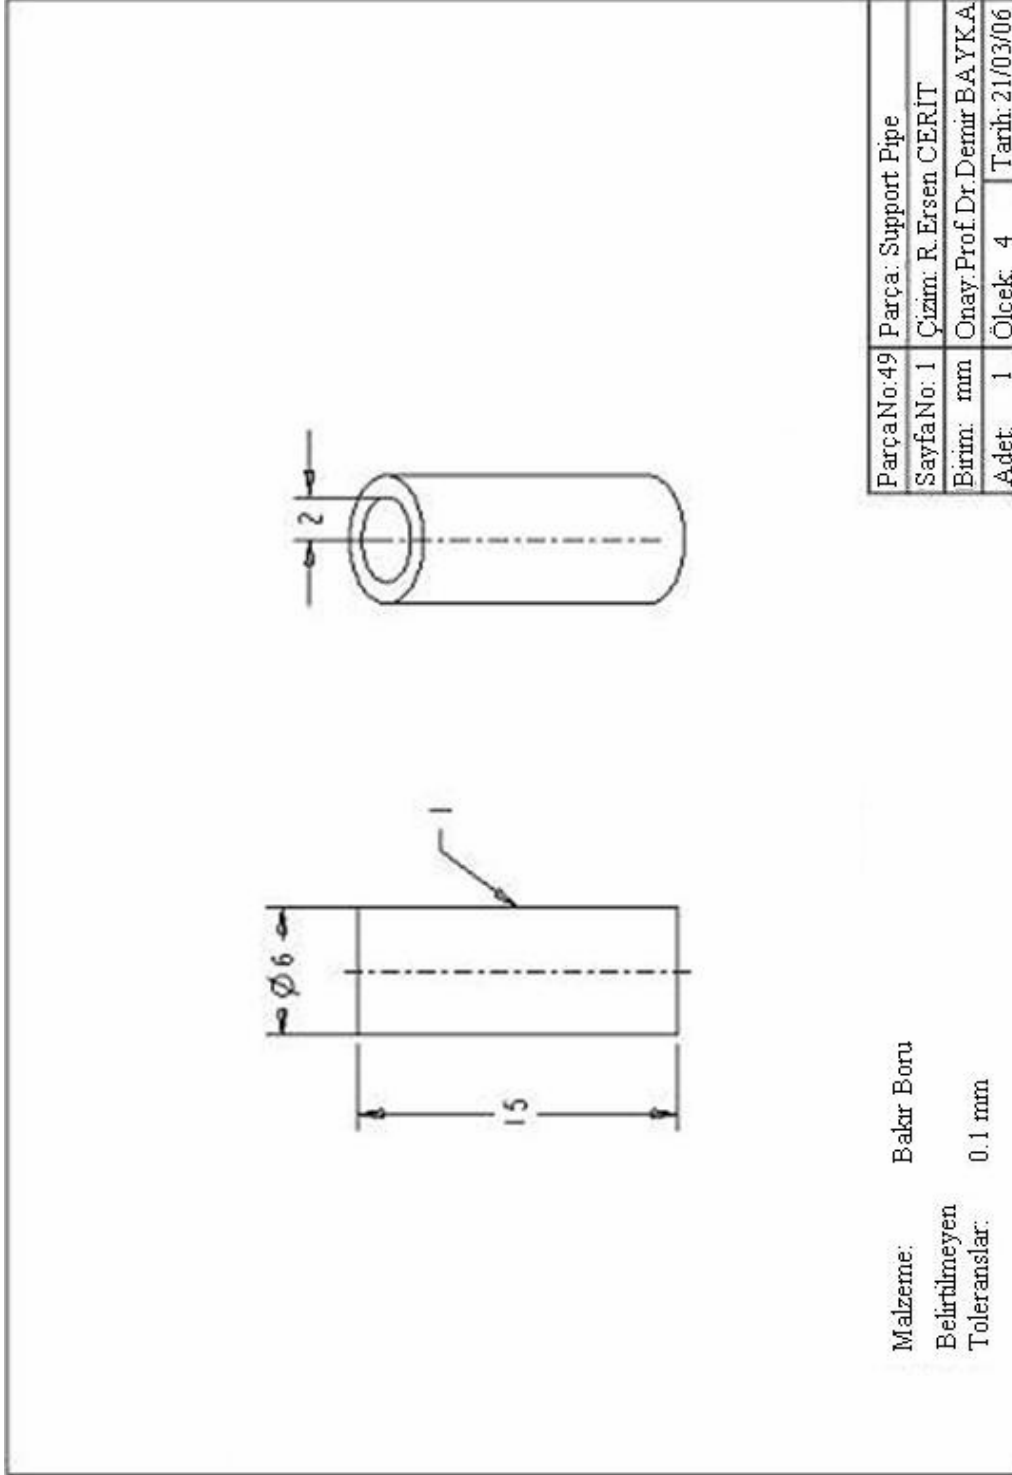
Technical Drawing of Fuel Glass Buoy Support.
